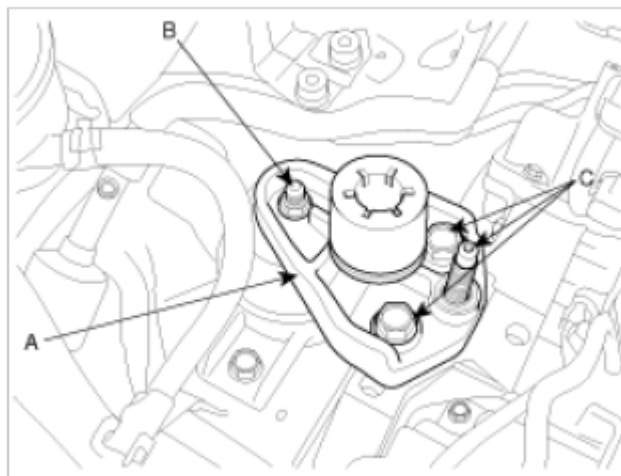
Identifying Engine Mounting Bracket With Mounting Nuts And Bolts
